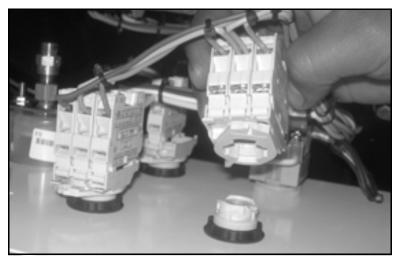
Turn the locking ring to disassemble the switch for removal.
